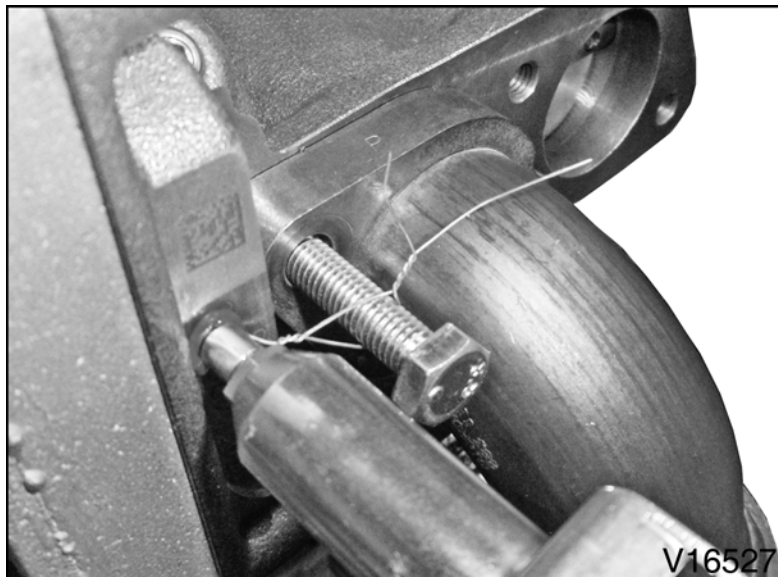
Tether Rivet/Spacer Assembly to Jig Bolt
